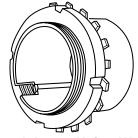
Adapter Using Washer (Bearing Bore ≤ 200 mm)
